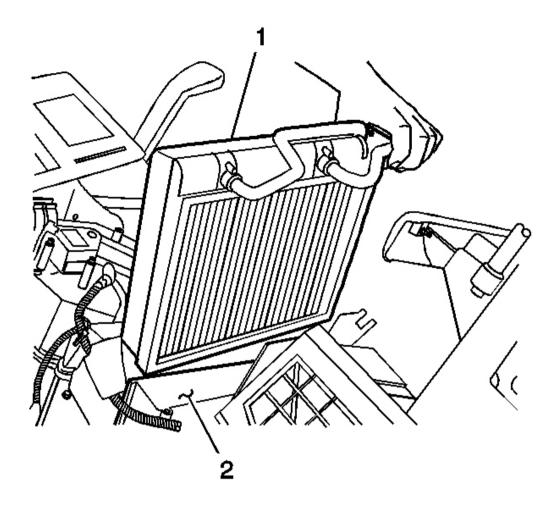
Evaporator Core & HVAC Module Courtesy of GENERAL MOTORS CORP.
